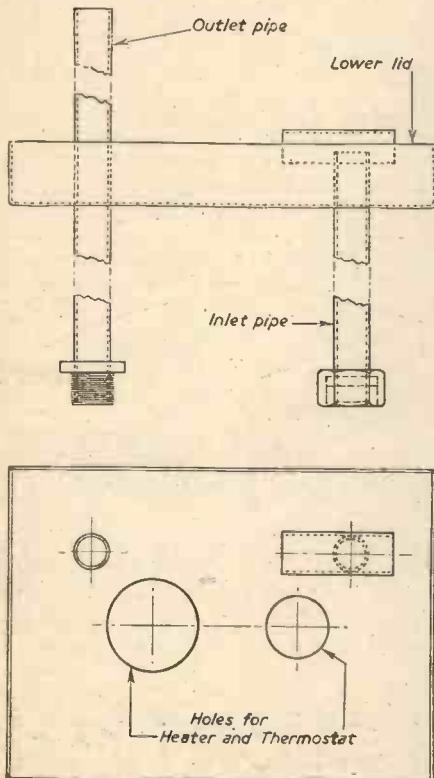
Assembly of inlet and outlet pipes in the lower lid.
